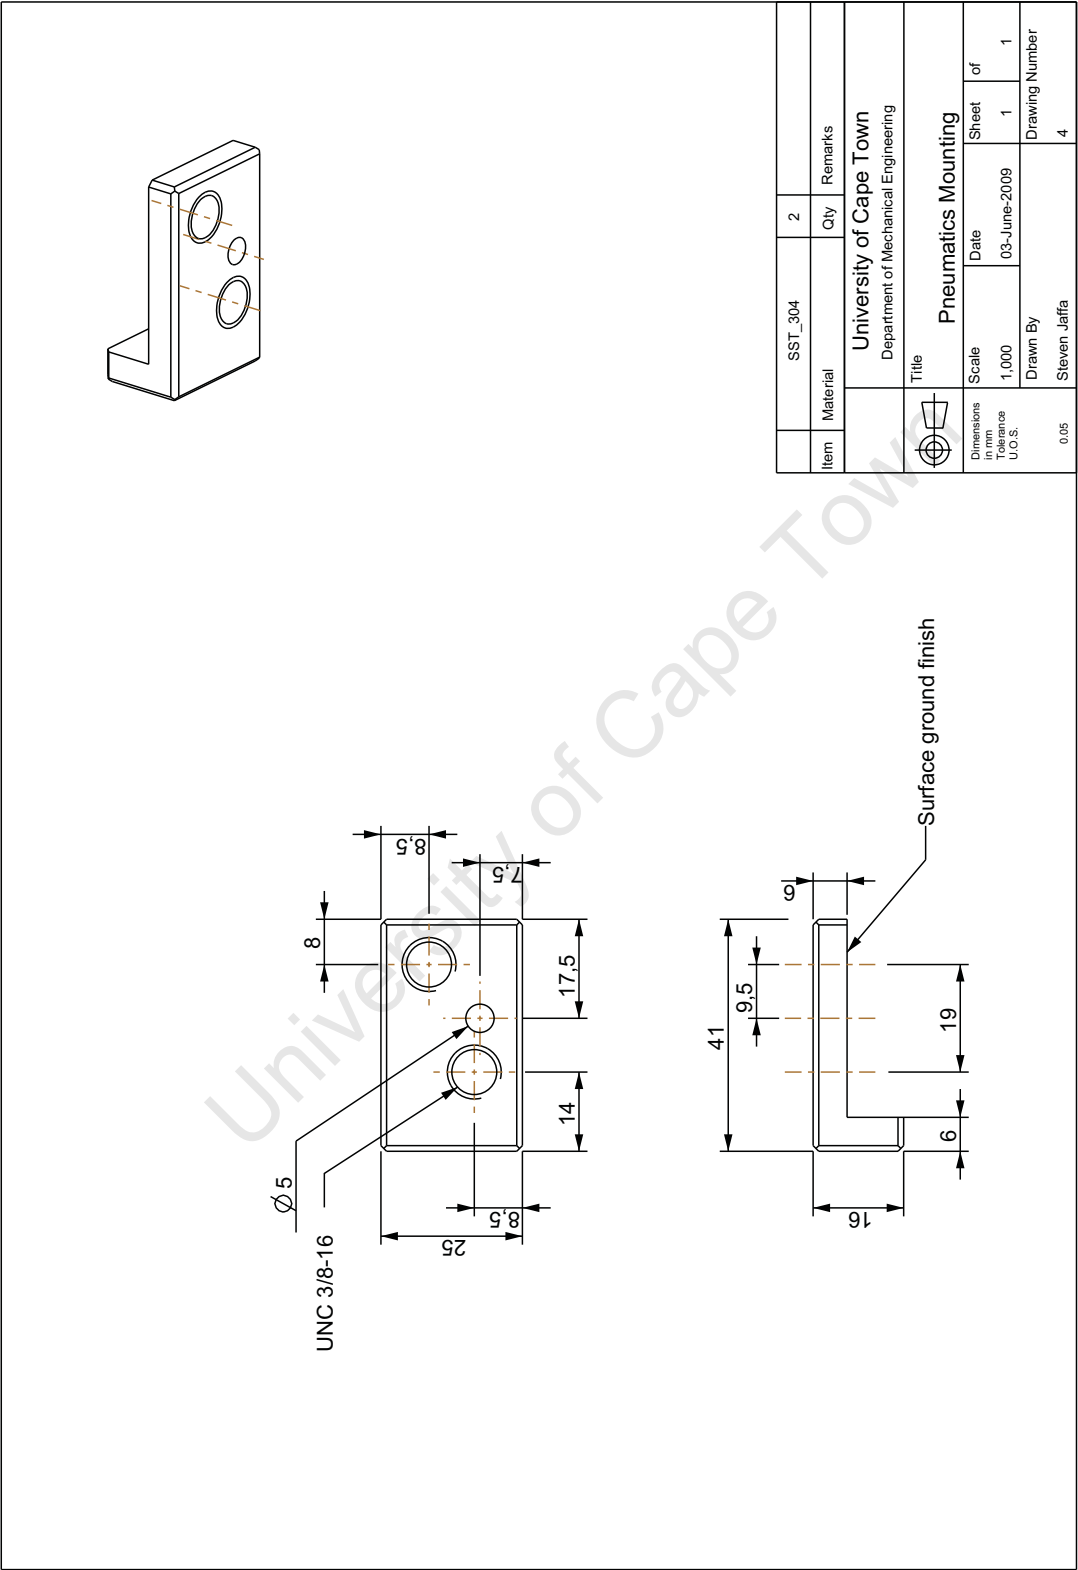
Manufacturing Drawing: Pneumatics Mounting.
